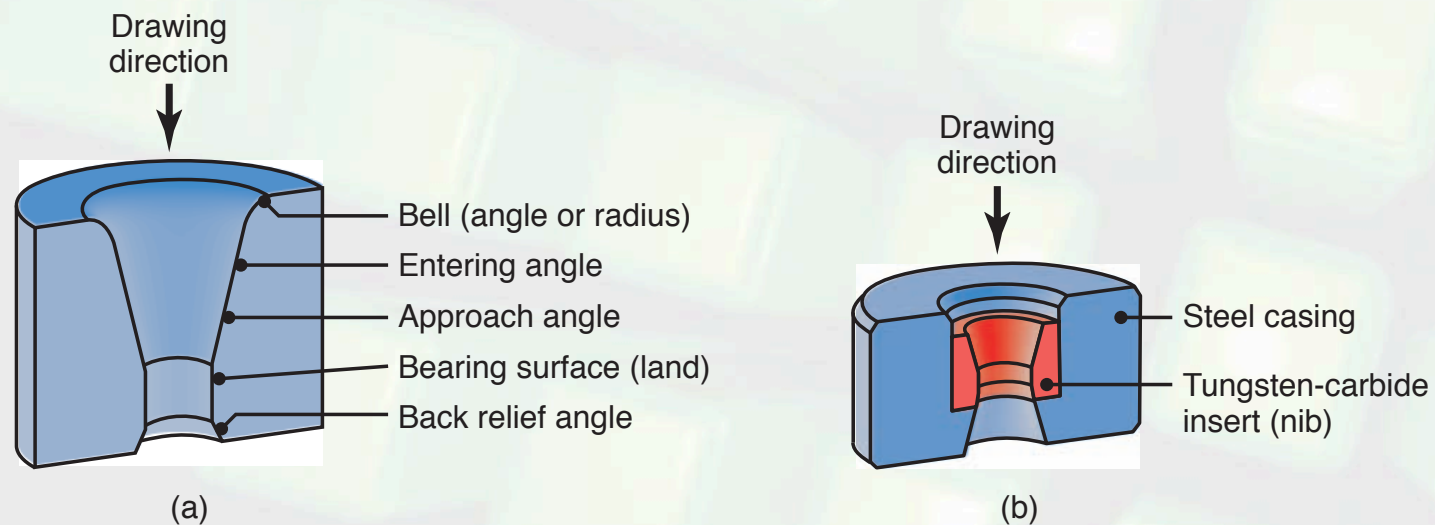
(a) Terminology for a typical die for drawing round rod or wire. (b) Tungsten-carbide die insert in a steel casing. Diamond dies, used in drawing thin wire, also are encased in a similar manner.
